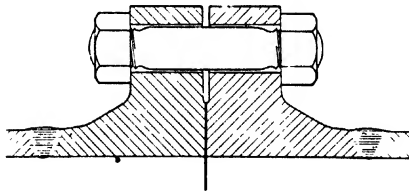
WELDED-ON FLANGE JOINT, TYPE "E"
